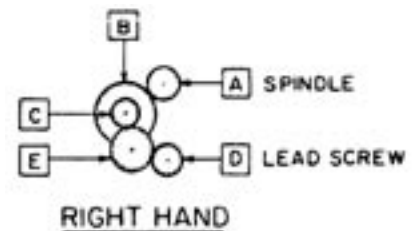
Gear Selection Chart for Thread Cutting Attachment
